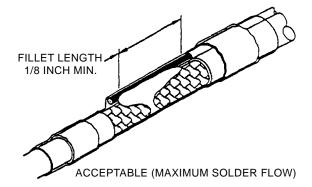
Immersion Resistant and Standard Solder Sleeve Installation (Sheet 2)
